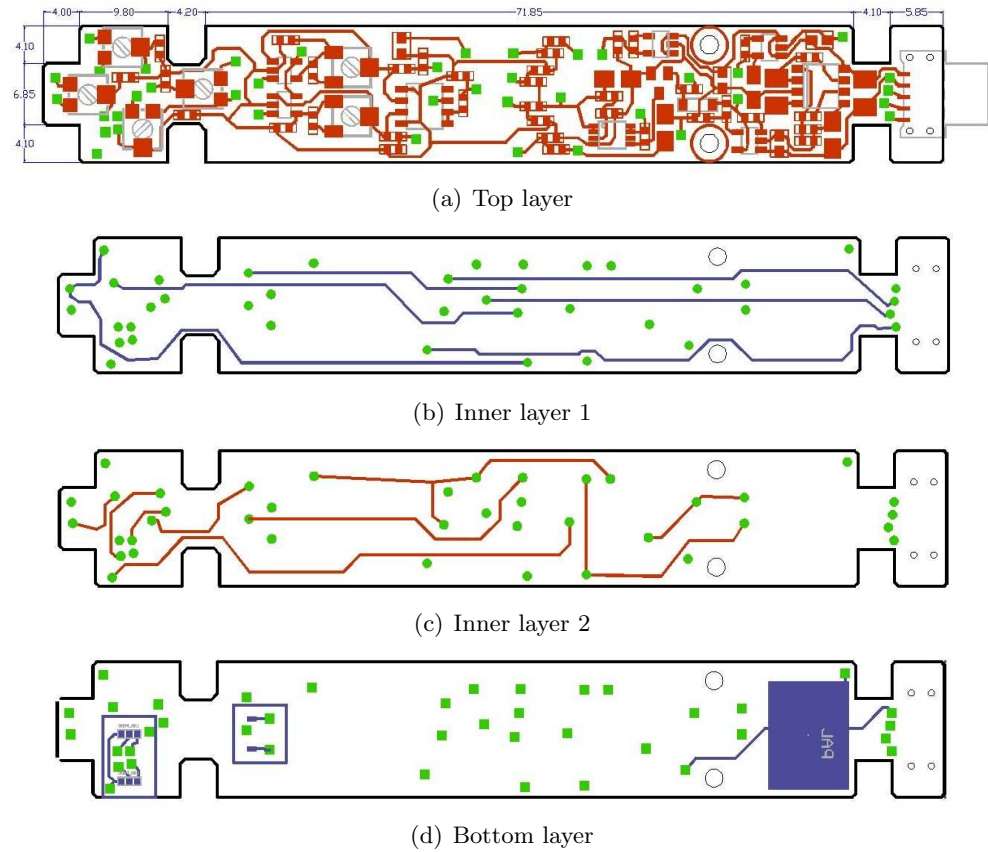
Designed PCB of the DC circuit of the W-band auto-calibrated receiver and its dimensions in mm.
